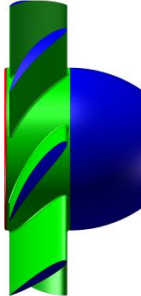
The green surfaces indicate the material which was removed with the 4th axis CNC mill.
